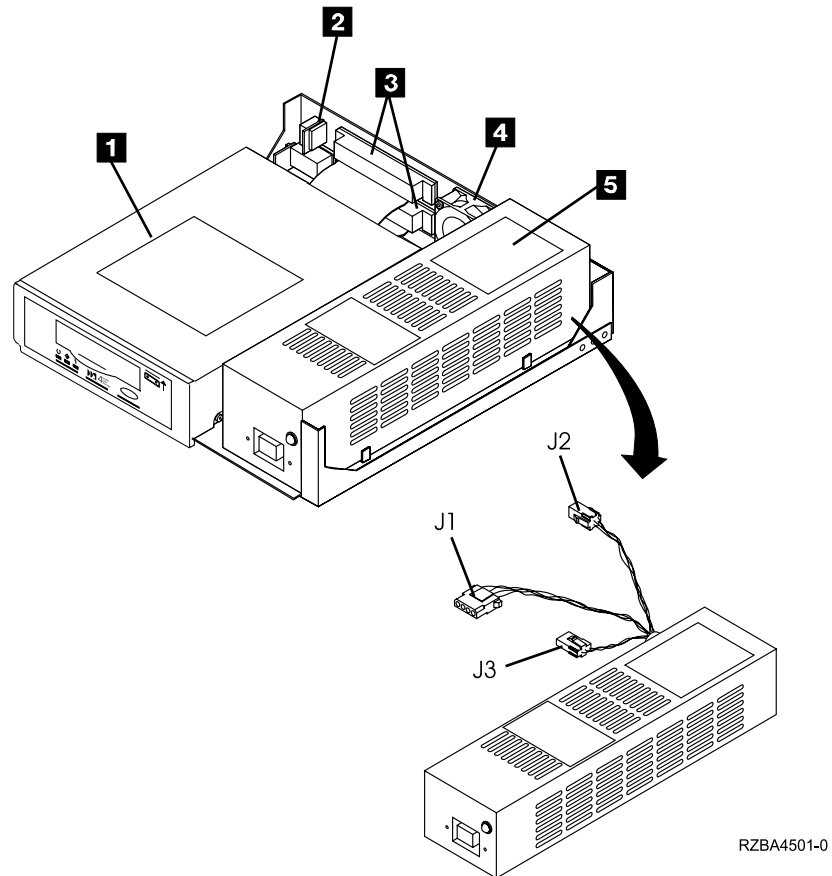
Internal View of the 7206 Model 220 Tape Drive
